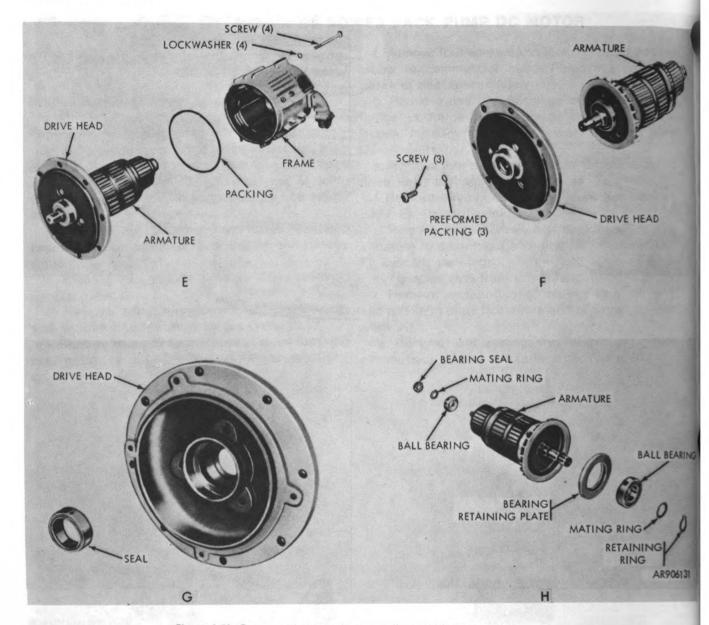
Power pack pump dc motor disassembly or assembly (2 of 2).
